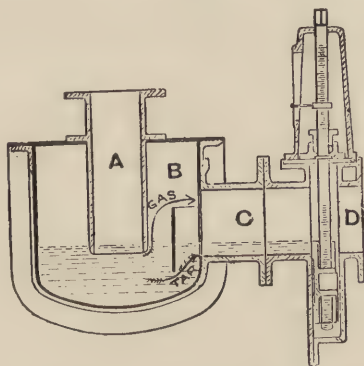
Section of Hydraulic Main and Dip Pipe.
